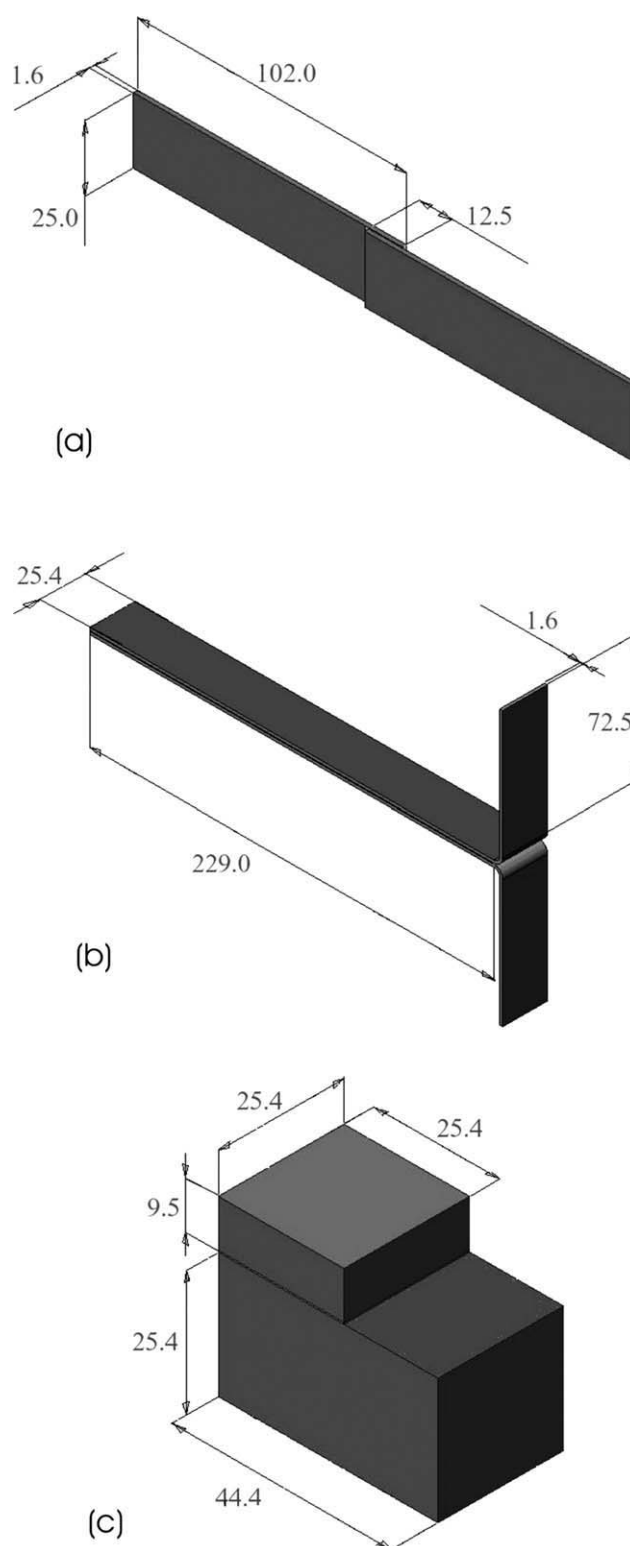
Geometry and dimensions of the adhesives joints of steel-steel (measured in mm). (a) single-lap shear joint, (b) T-peel joint, (c) impact joint.
